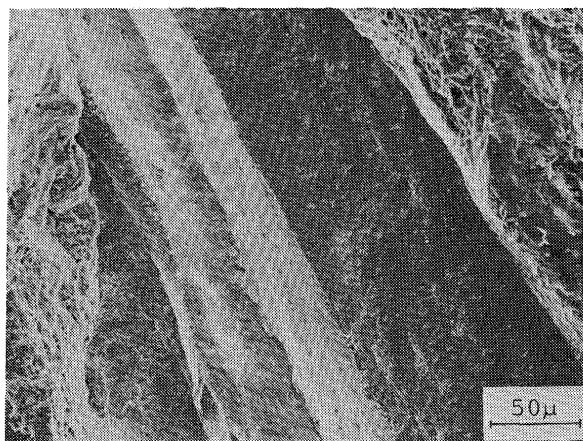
Ductility-dip cracked surface in weld metal of SUS310S occurred with Trans-Varestraint test
